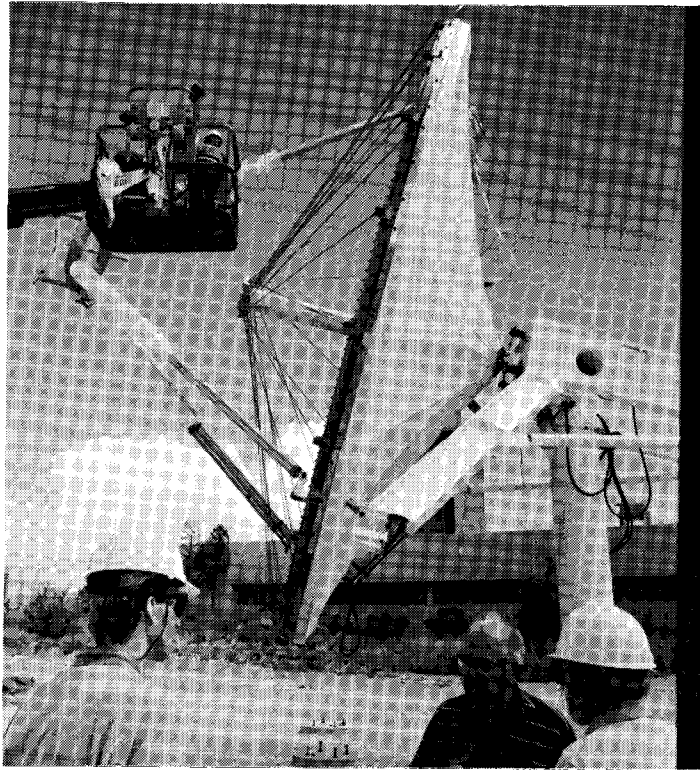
7-M Optical Element Mounted to Drive Adapter at SNLA.
